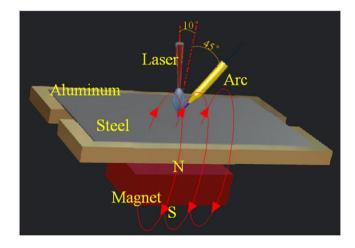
Schematic of laser welding of steel and aluminum.
